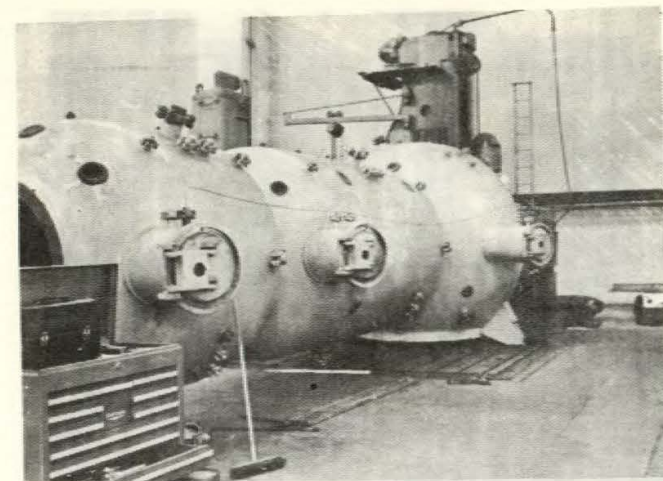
Setting in front of the Morton for finish drilling some holes and machining a gasket seat.
